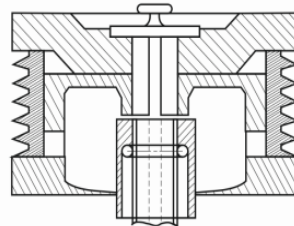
Drawing of discrete pneumatic spinning machine's drum.
